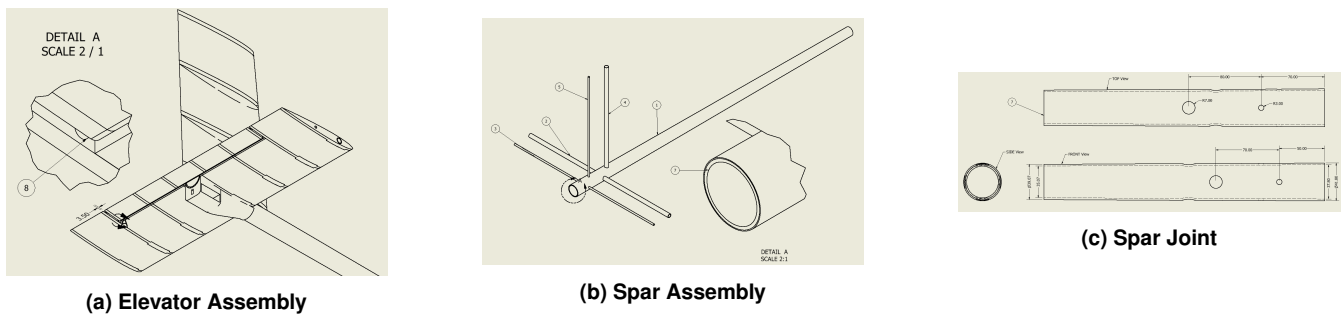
Orthographic drawings of the Elevator, Spar Joint and Spar Assembly
